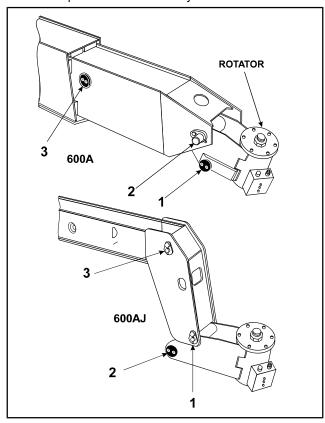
Reassembly of Components - Rotator and Slave Leveling Cylinder
